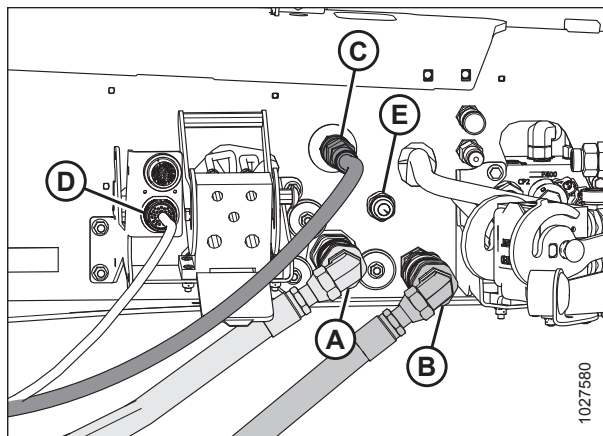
Hydraulics and Electrical Installed—Auger/Rotary/Draper-Ready Windrower
